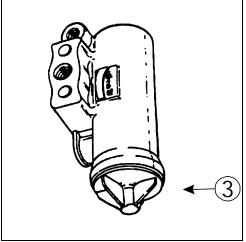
GOVERNOR ③ AJUSTING SCREW COVER
